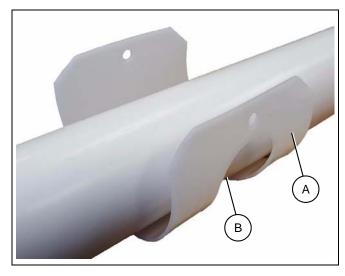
C Kwik-Attach Drop Kit Installation for PVC and Welded Steel Tubing (APCD-109)
